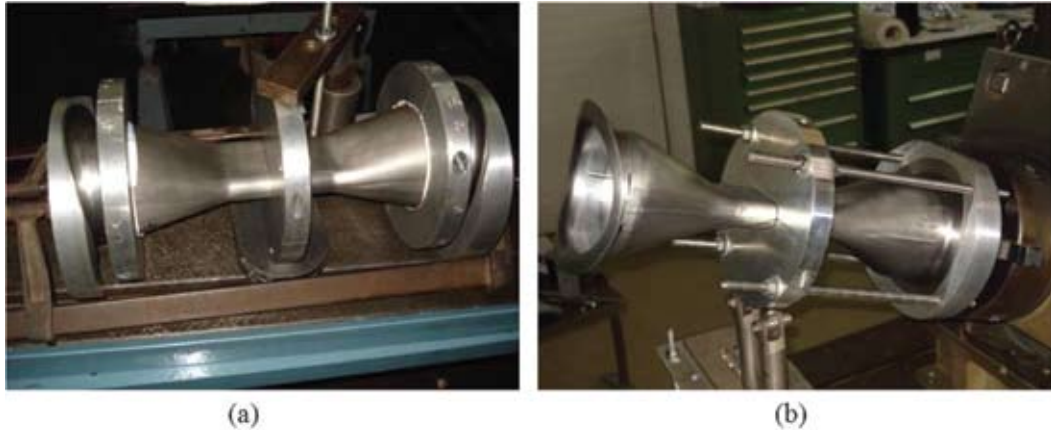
(a) Setup for assembling the Spoke and Shell Collars to ensure proper clocking and alignment of the components, (b) setup showing the electron beam welding of the Shell Collar to the Spoke.
